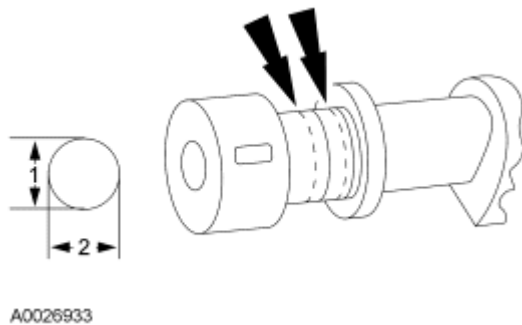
Locating Areas For Measuring Camshaft Journal Diameter
